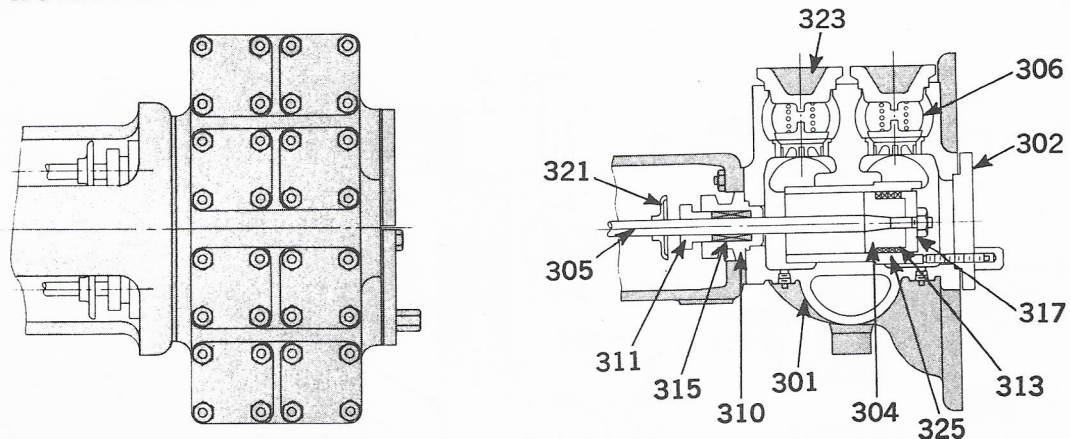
LIQUID END, HORIZONTAL SIDE POT PISTON PUMP
